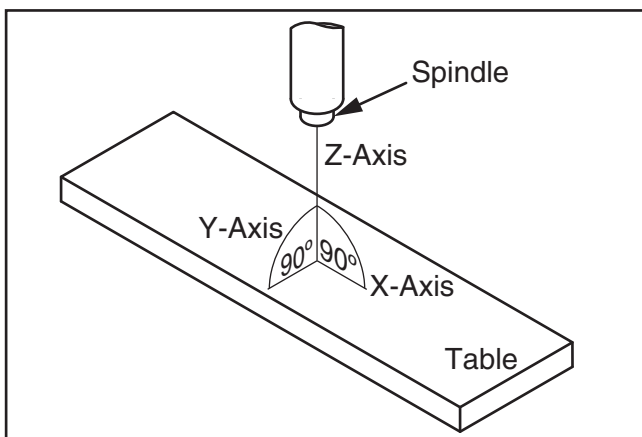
Spindle Z-axis perpendicular to the table X- and Y-axes.
